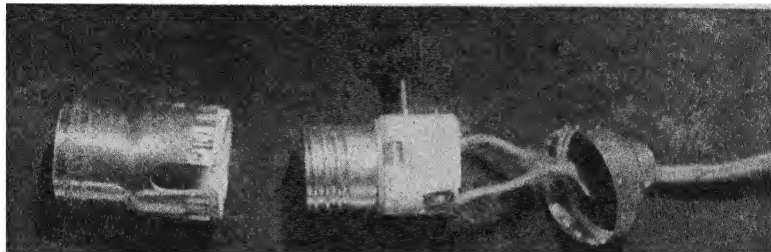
Parts of the ordinary light socket. Such sockets are often easily repaired if you know how to take them apart. But you must be sure that the current is off.
